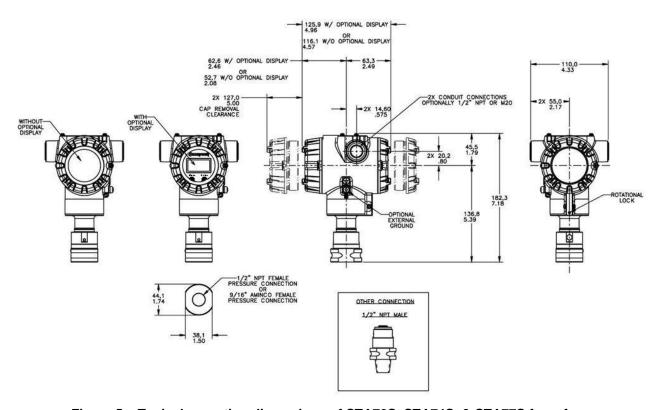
Typical mounting dimensions of STA72S, STA74S, & STA77S for reference
